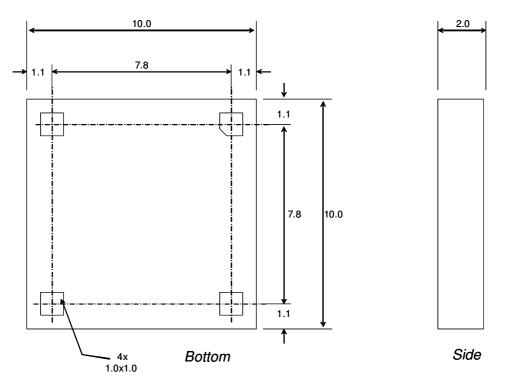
Mechanical Drawing (all dimensions are nominal and in mm)
